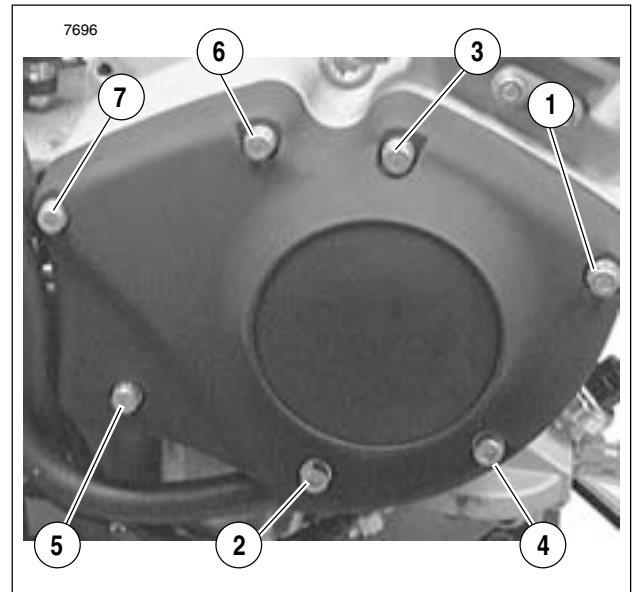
Gearcase Cover Mounting Screw Torque Sequence
